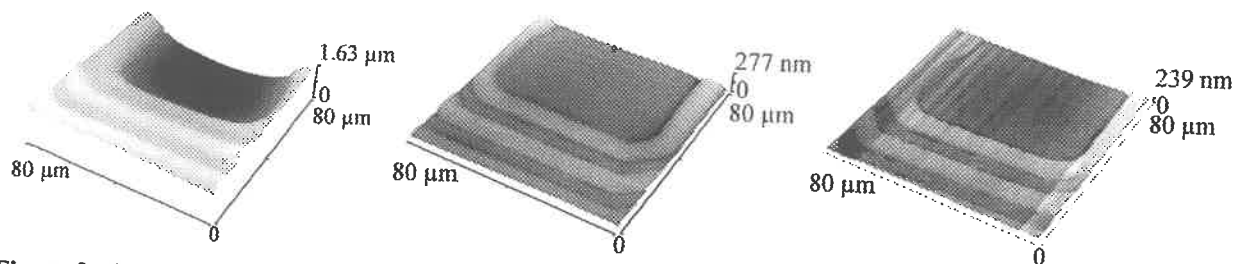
AFM topography analysis of the SU-8/Cu combination after machining with a Politex® Supreme pad (left), after machining with a Suba 1200 pad (middle), after machining with a IC 1400 pad (right)
